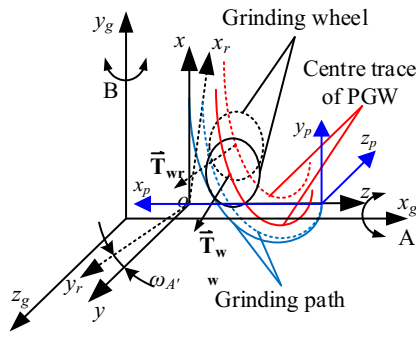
Transformation between coordinate systems of workpiece and machine tool
